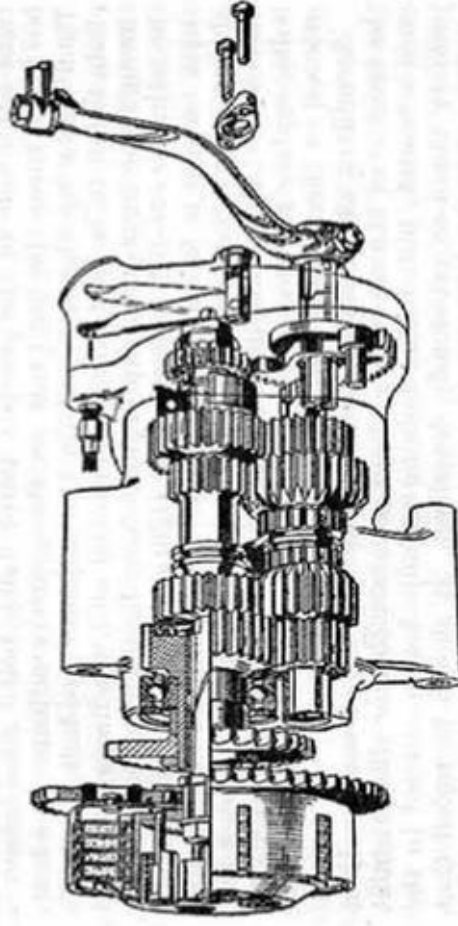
CUT-AWAY VIEW SHOWING INTERNAL DETAILS OF BURMAN FOUR-SPEED GEARBOX AND MULTI-PLATE CLUTCH
